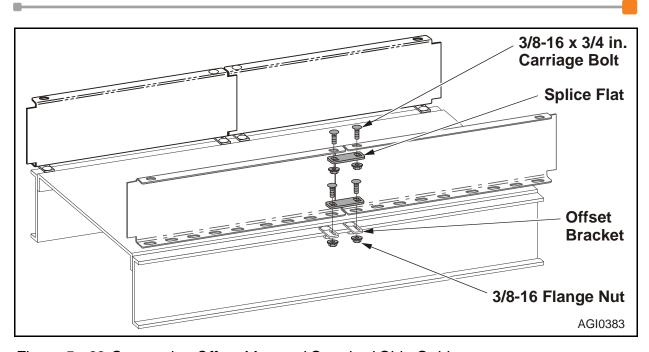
82 Connecting Offset-Mounted Standard Side Guides
